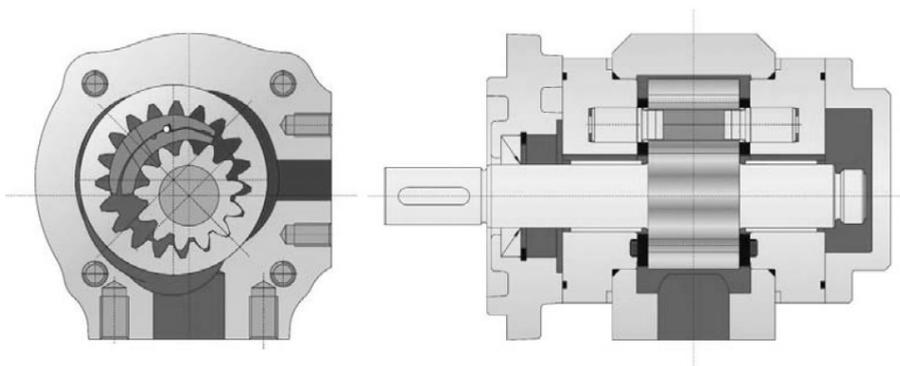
Cross-sectional view of a pump with internal gearing with radial compensation. [18]
